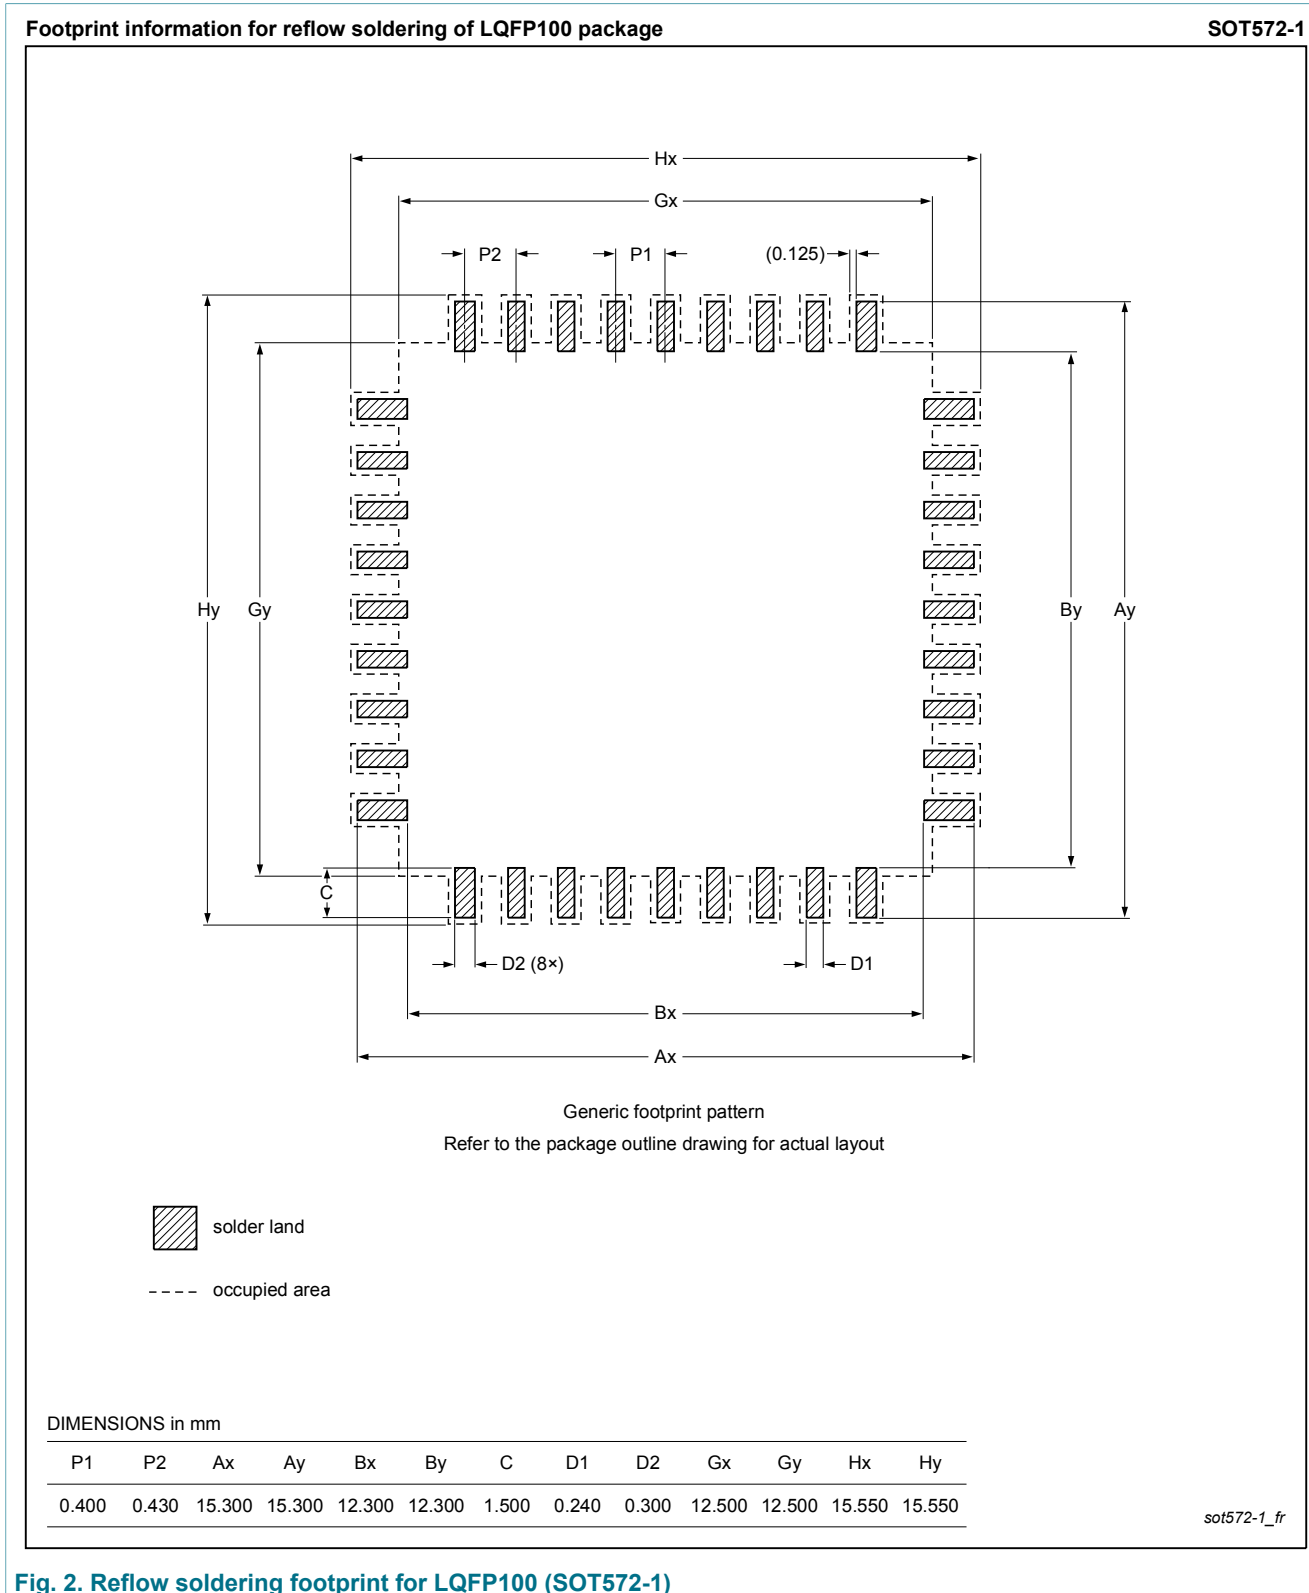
Reflow soldering footprint for LQFP100 (SOT572-1)
